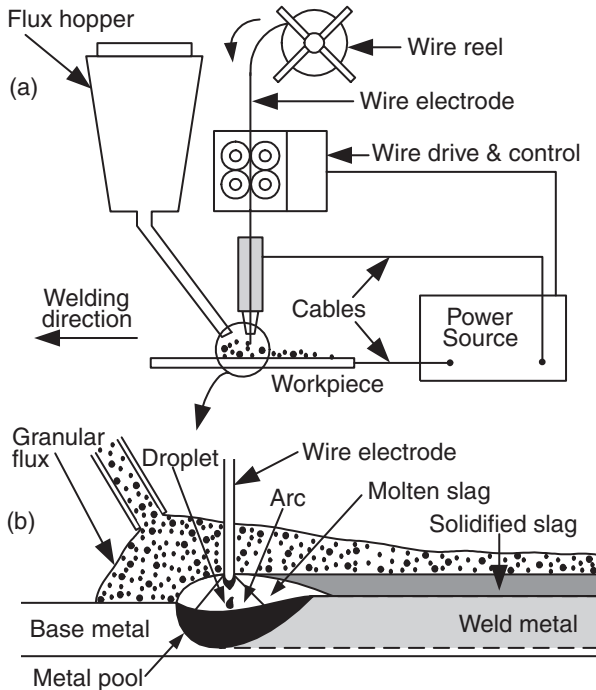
Submerged arc welding: (a) overall process; (b) welding area enlarged.
